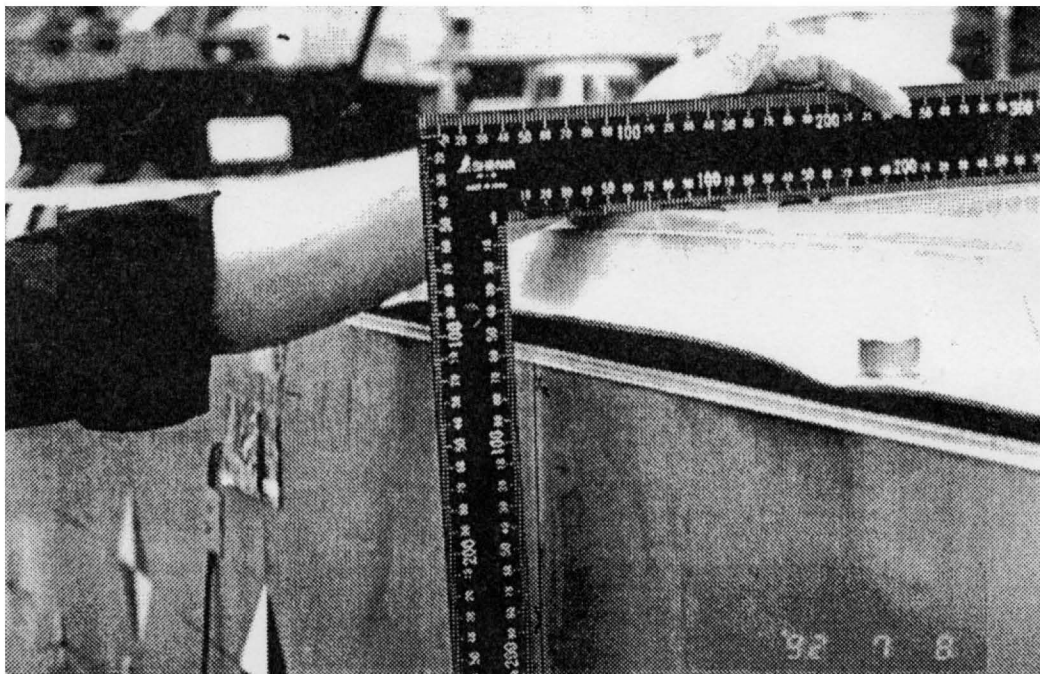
CTU 1J 9-m Vertical End Drop: Close-Up Side View of Bottom Damage
